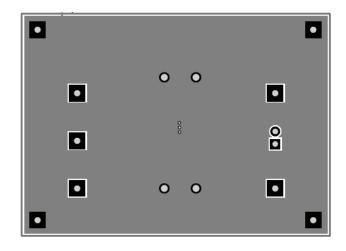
AAT4681IDE Evaluation Board Bottom Side Layout
